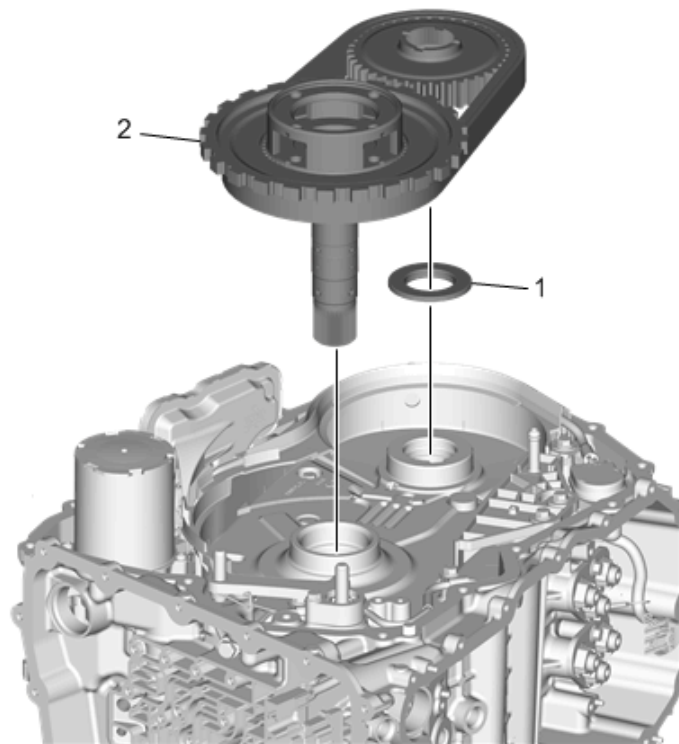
Drive Sprocket, Driven Sprocket And Drive Link
